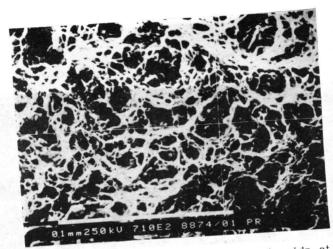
Ductile fracture. Carbides, σ -phase and voids at the places where carbides were before.
